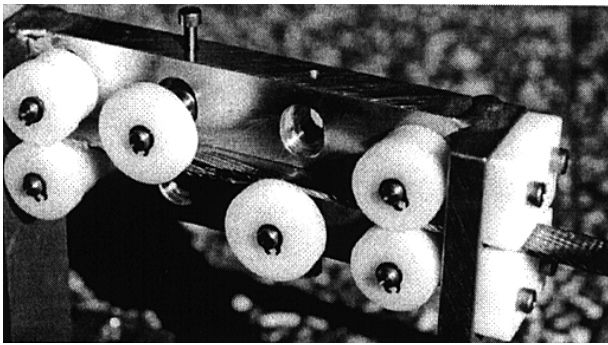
Mechanism for continuously opening and closing cable so that metal/solder cream may be injected into the interior.
